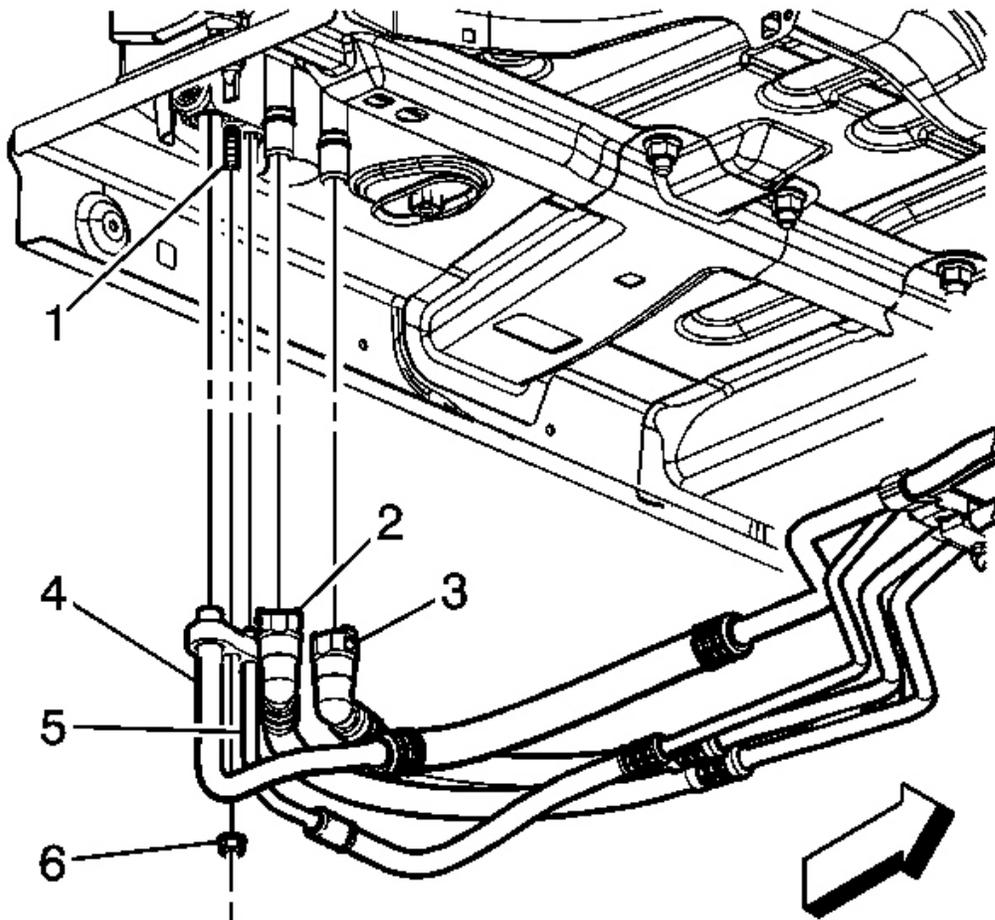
Identifying Heater Lines, Air Conditioning Lines & Components
